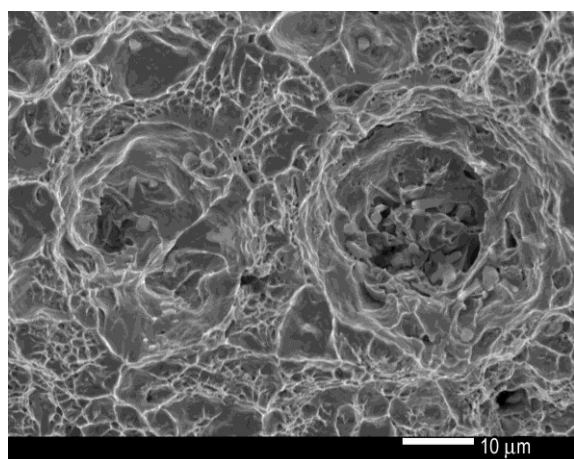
A cluster of non-metallic inclusions on the fracture of the tested material - cast steel B
